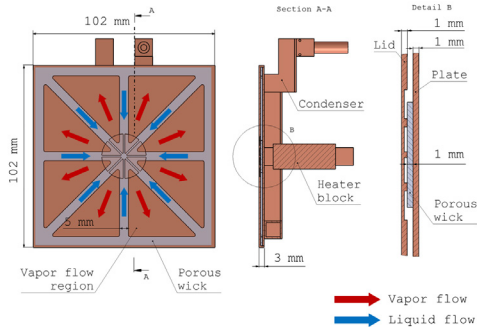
Structure and dimensions of the tested vapor chamber-type heat spreader.
